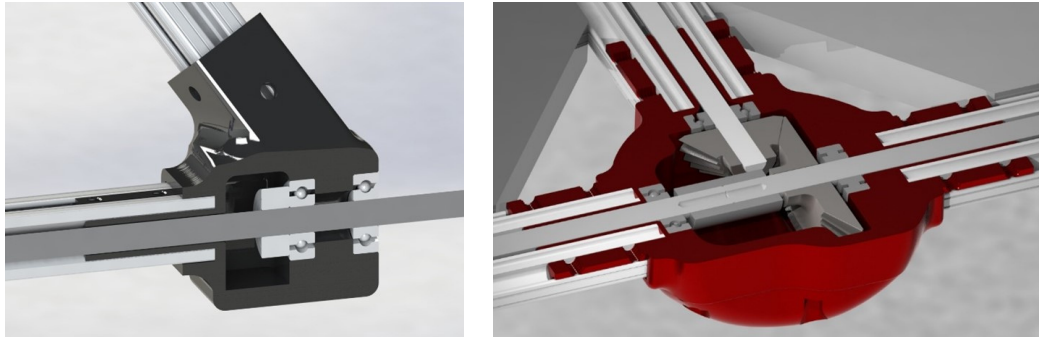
& 4 – Onyx pedal shaft and aluminum extrusion hub (left)[TK1] . H13 tool steel driveshaft to live differential adapter (right).
